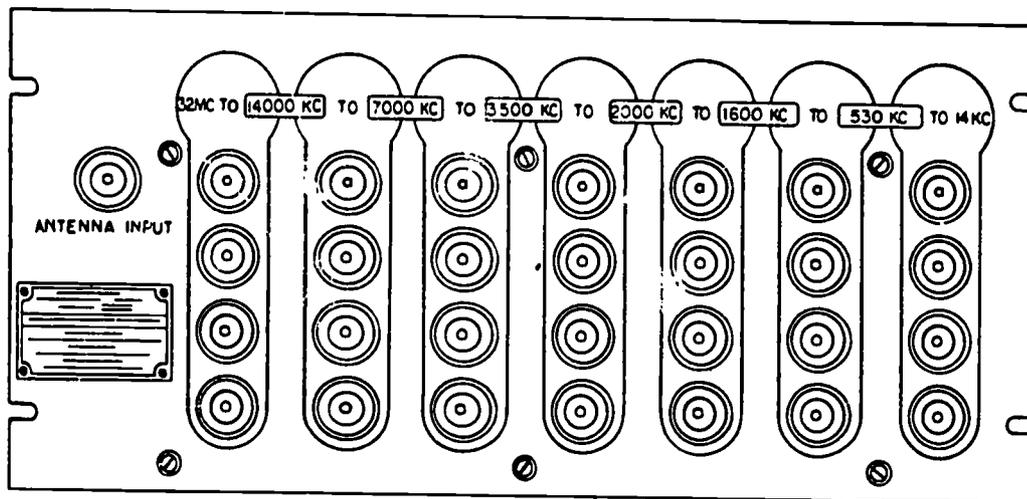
Electrical Filter Assembly AN/SRA-12.
